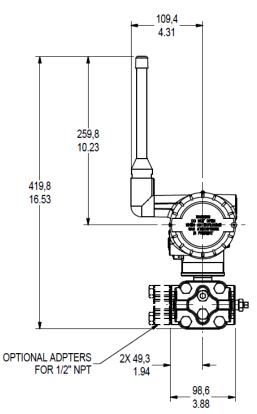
Dual Head Gauge, , typical mounting dimensions for STGW740, STGW770 (4 dBi antenna shown, rear view)
